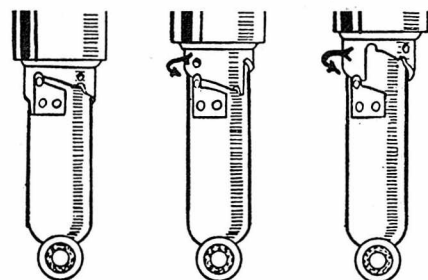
Rear suspension units are adjustable. Left view shows soft, center is medium and right is firm positions.
